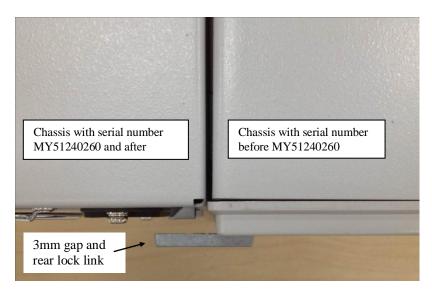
Top view 3mm gap observed on rear lock link for side-by-side rack mounting
